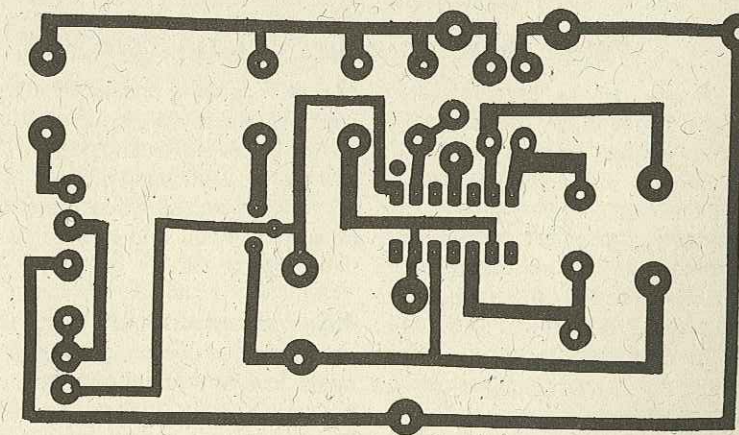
Actual-size etching and drilling guide at right. Parts placement guide above.
